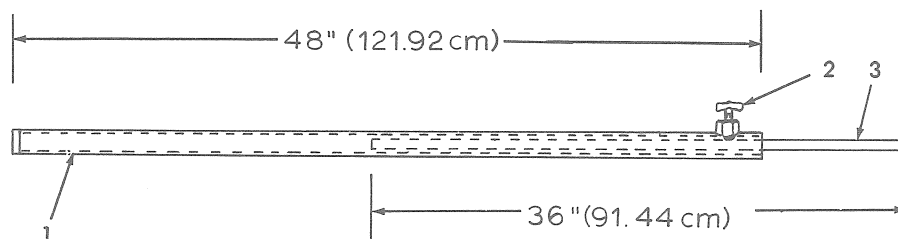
TOOL USED TO CHECK TRACK FRAME TOE-IN/TOE-OUT
